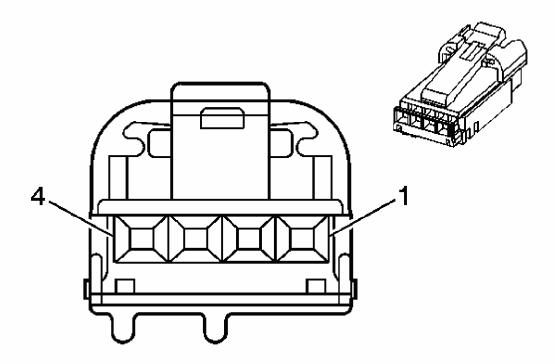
Steering Wheel Control Switch Connector End View - Right Courtesy of GENERAL MOTORS CORP.
